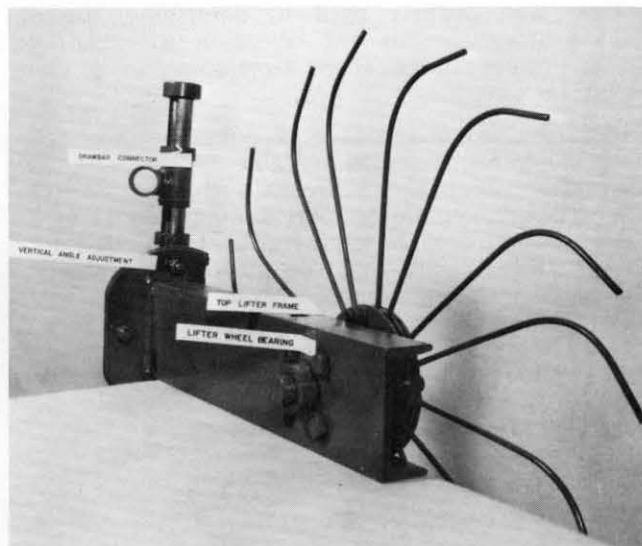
The top lifter wheel assembly for the U-I rotary blade topper.
